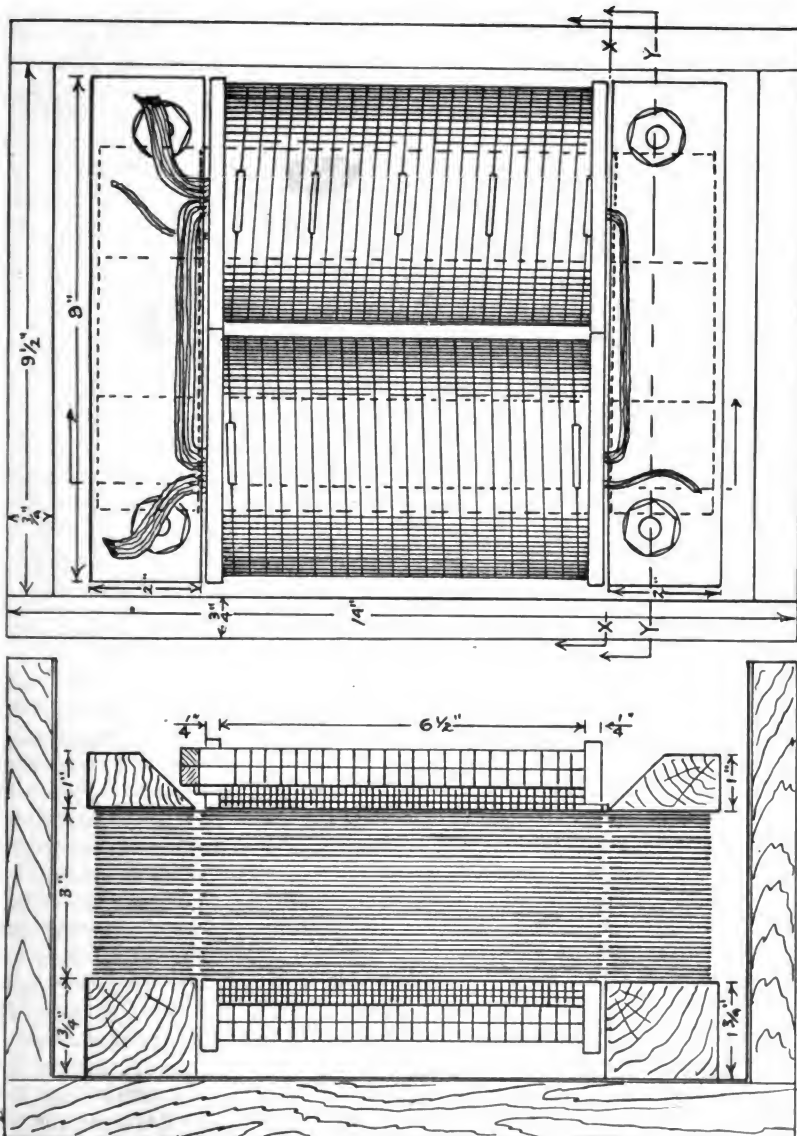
TOP AND END VIEW OF TRANSFORMER CONSTRUCTION
